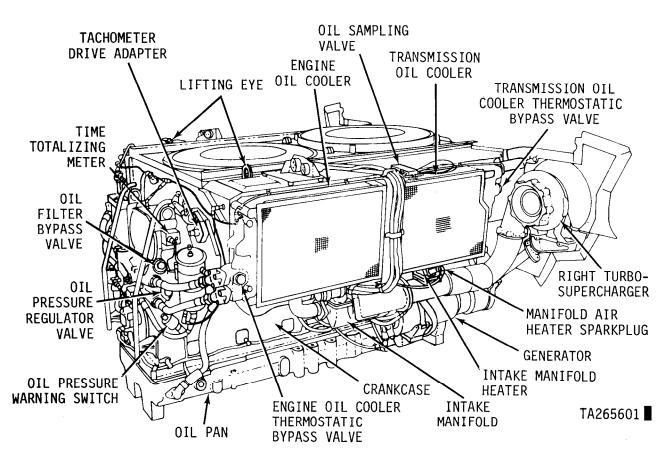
AVDS-1790-2C engine assembly - right front view.
